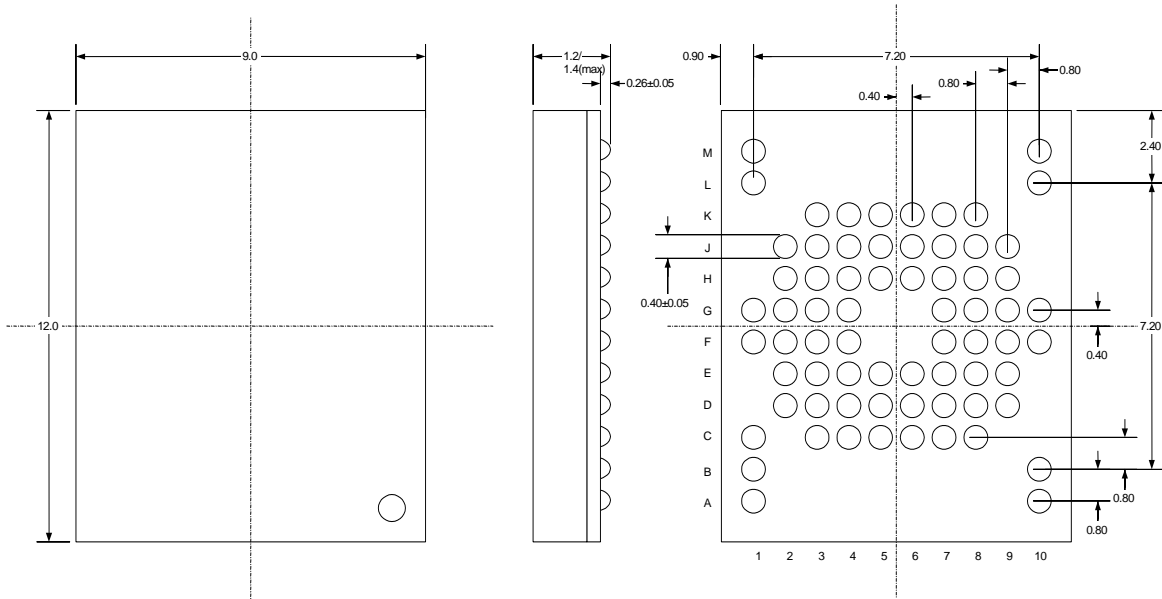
Mechanical Dimensions 9x12 FBGA Package
